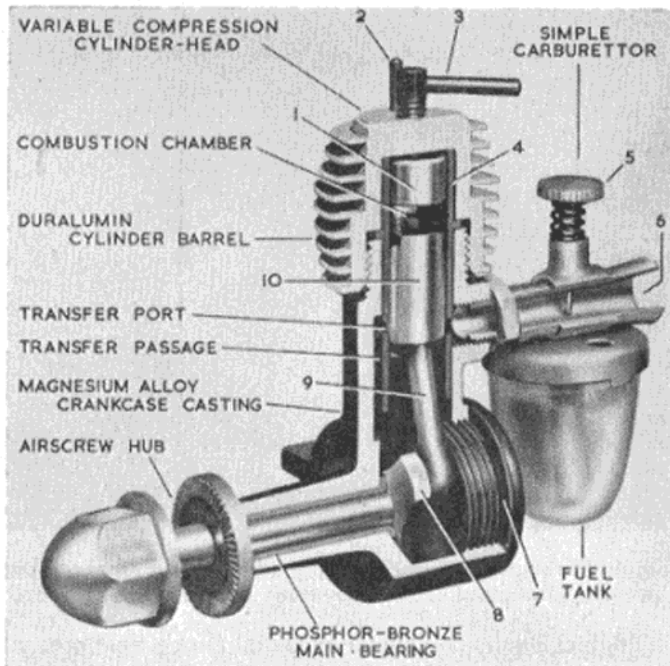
A MODEL AIRCRAFT cutaway drawing of the British Mills 75 diesel motor. In addition to the main features indicated, parts are as follows: 1—contra-piston, 2—compression stop, 3—compression lever, 4—cylinder liner, 5—needle-valve control, 6—air intake, 7—crankcase backplate, 8—crankshaft web, 9—connecting-rod, 10—piston.
